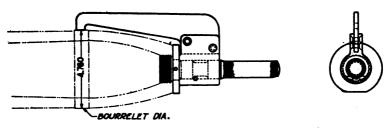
Sketch showing type of gauge used to inspect concentricity of fuze thread and bourrelet diameter in shells.
